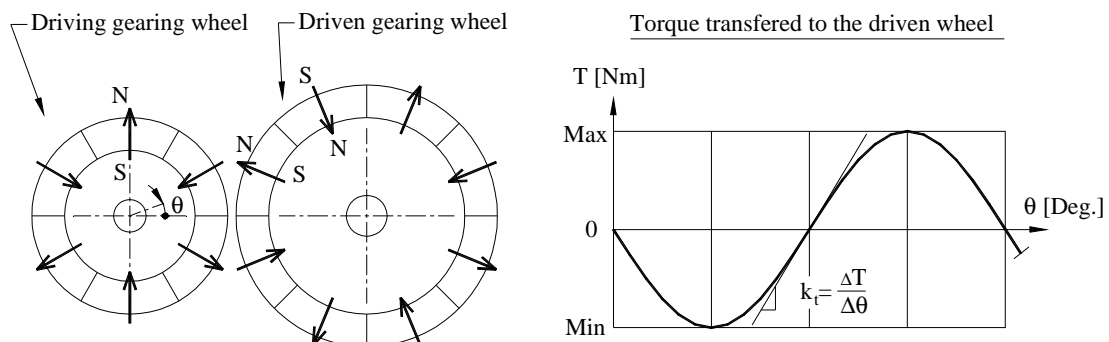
A magnetic gear and a torque diagram, where the torque versus turning angle on the driving gear wheel is shown.
